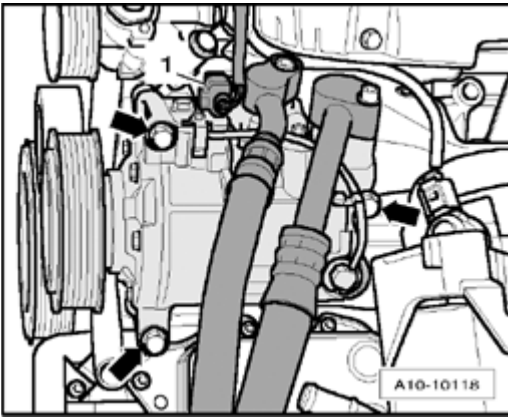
Disconnecting Connector For Wiring To Air Conditioning Compressor Clutch Solenoid
